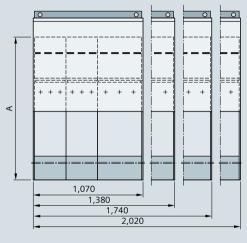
/12: Side and front views with panel dimensions for 8DJH Compact panel blocks and for outdoor enclosures (dimensions in mm) back to page 29
